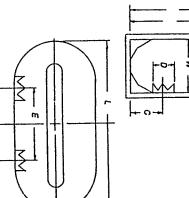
Horizontal double rotor pulper: W= hib width; L= hib length; H= hib height; Z= stock level; D= rotor dameter; G= rotor of bottom distance; E= rotor spacing.
